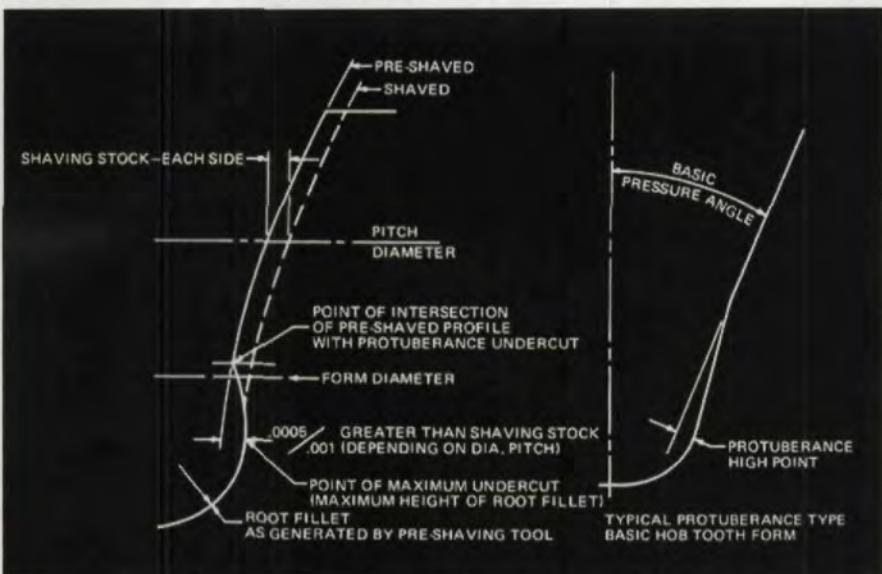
Undercut produced by protuberance hob and basic hob tooth form.
